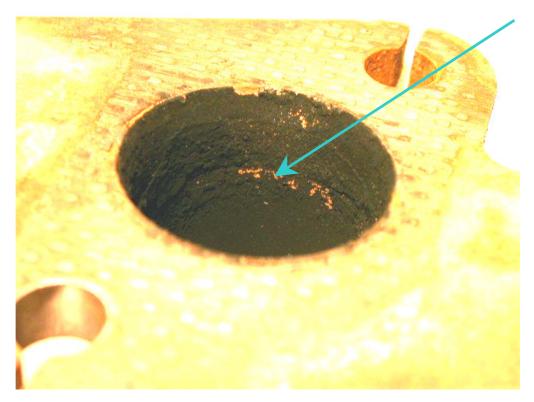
Internal view of extractor pipe at engine flange showing carbon coating and pipe cracking (arrow).
